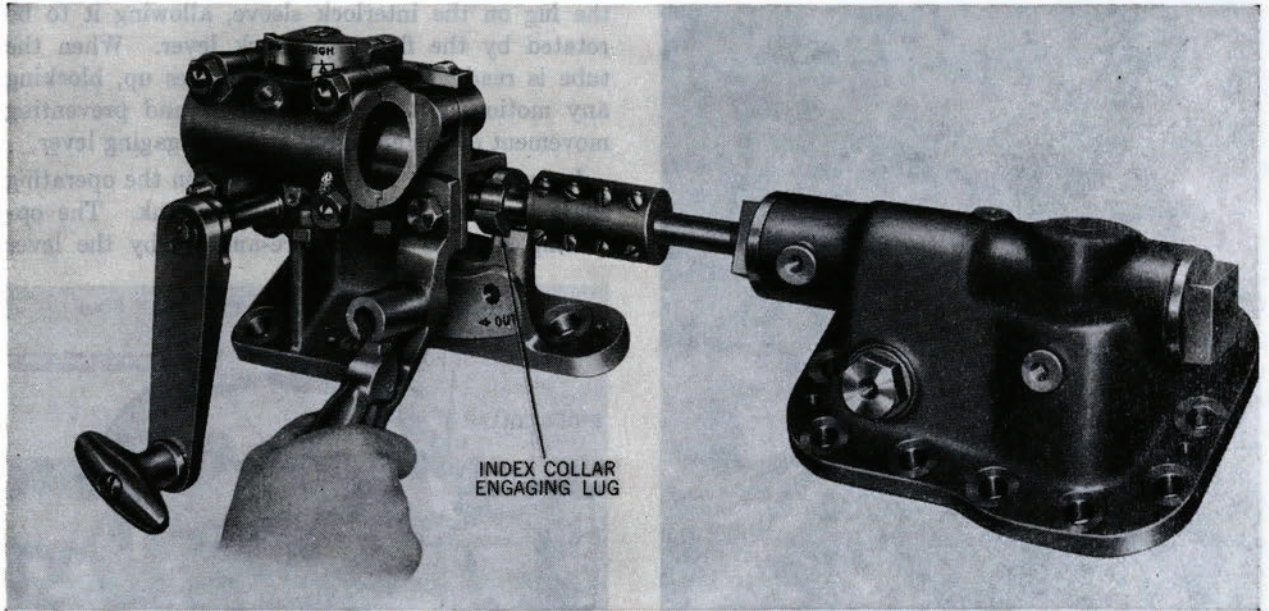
Simple Type Speed Setting Mechanism—Spindle OUT—Hand Crank Locked at HIGH.
